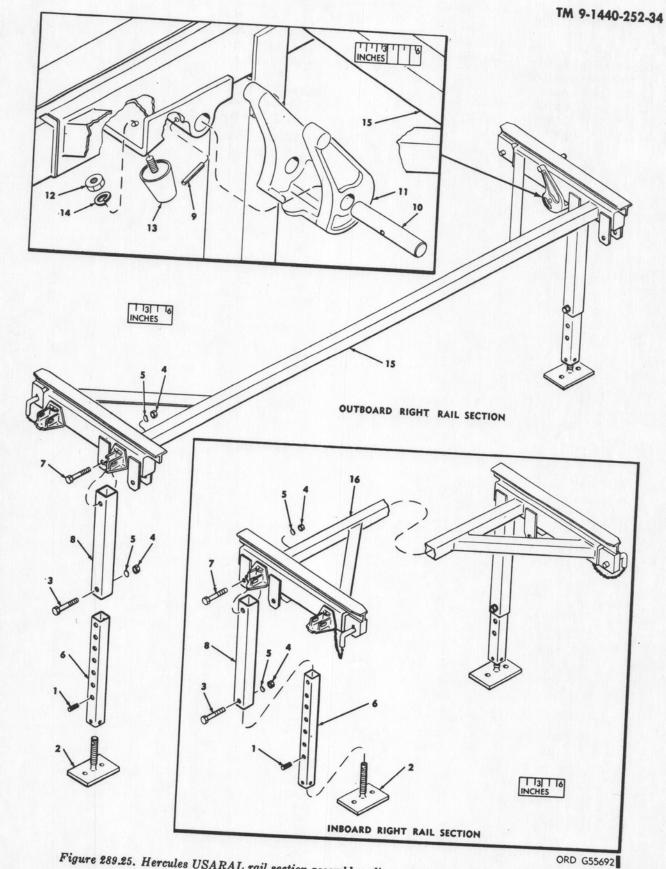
Hercules USARAL rail section assembly—disassembly and assembly—typical.
